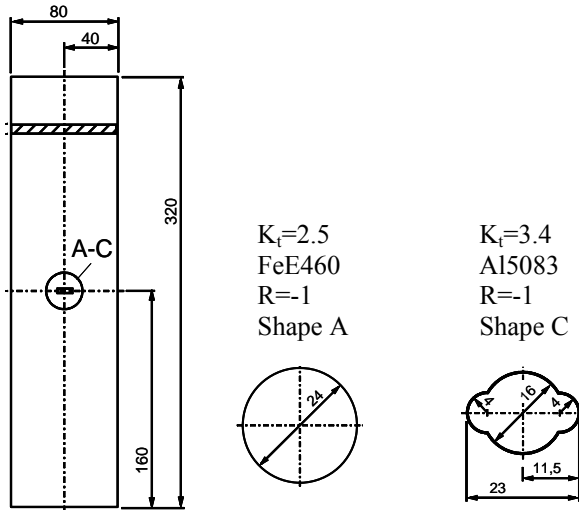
Specimen's geometry and load configuration, dimensions in [mm].
